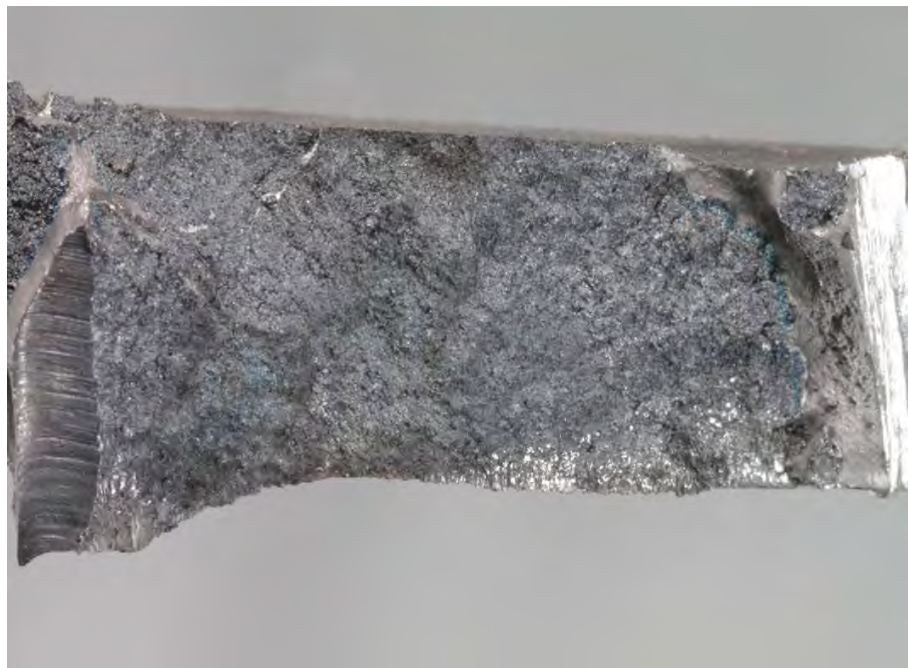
Close-up of surface of fracture through crack No. 2 from SID 14875 subsegment "C4" shown in Fig. 168.
